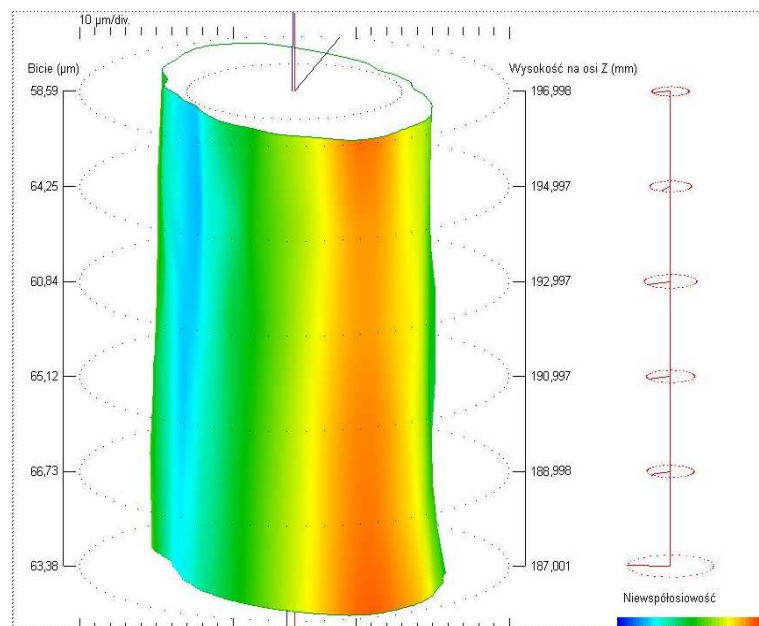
The example of shape accuracy of electrode for EDM process (experiment 2). Drill electrode make of copper
